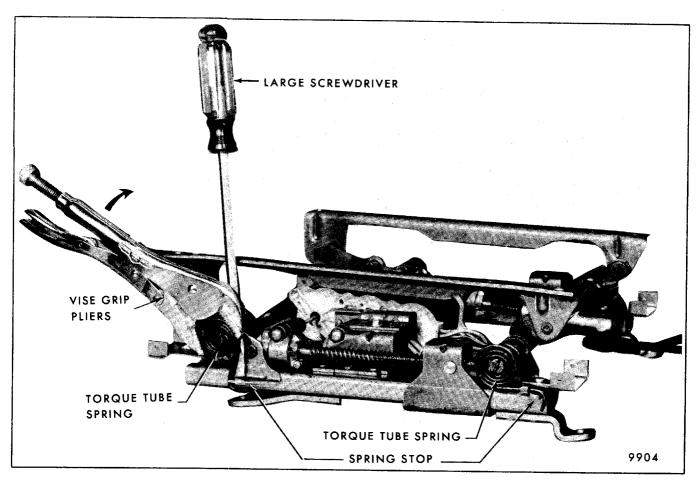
Six-Way Seat Adjuster Vertical Torque Springs - Cadillac 6CB69 Only
